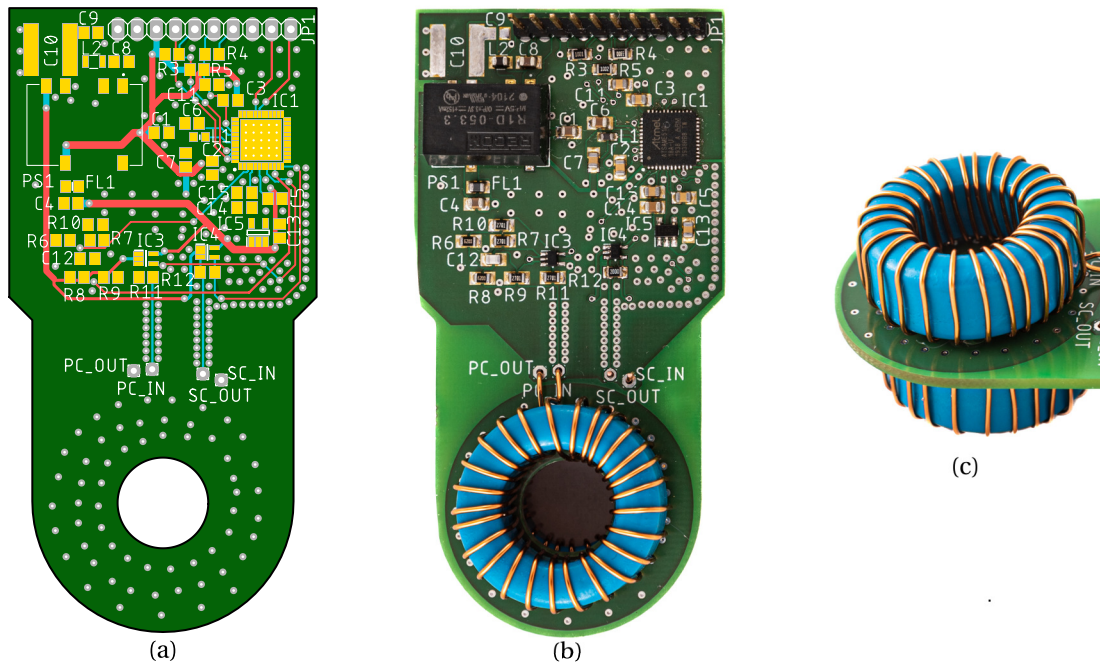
Photos of the implemented sensor circuit prior to cast molding in resin. *a:* PCB-Layer design; *b:* Assembled Sensor; *c:* side-view of coil assembly with 26 turns.
